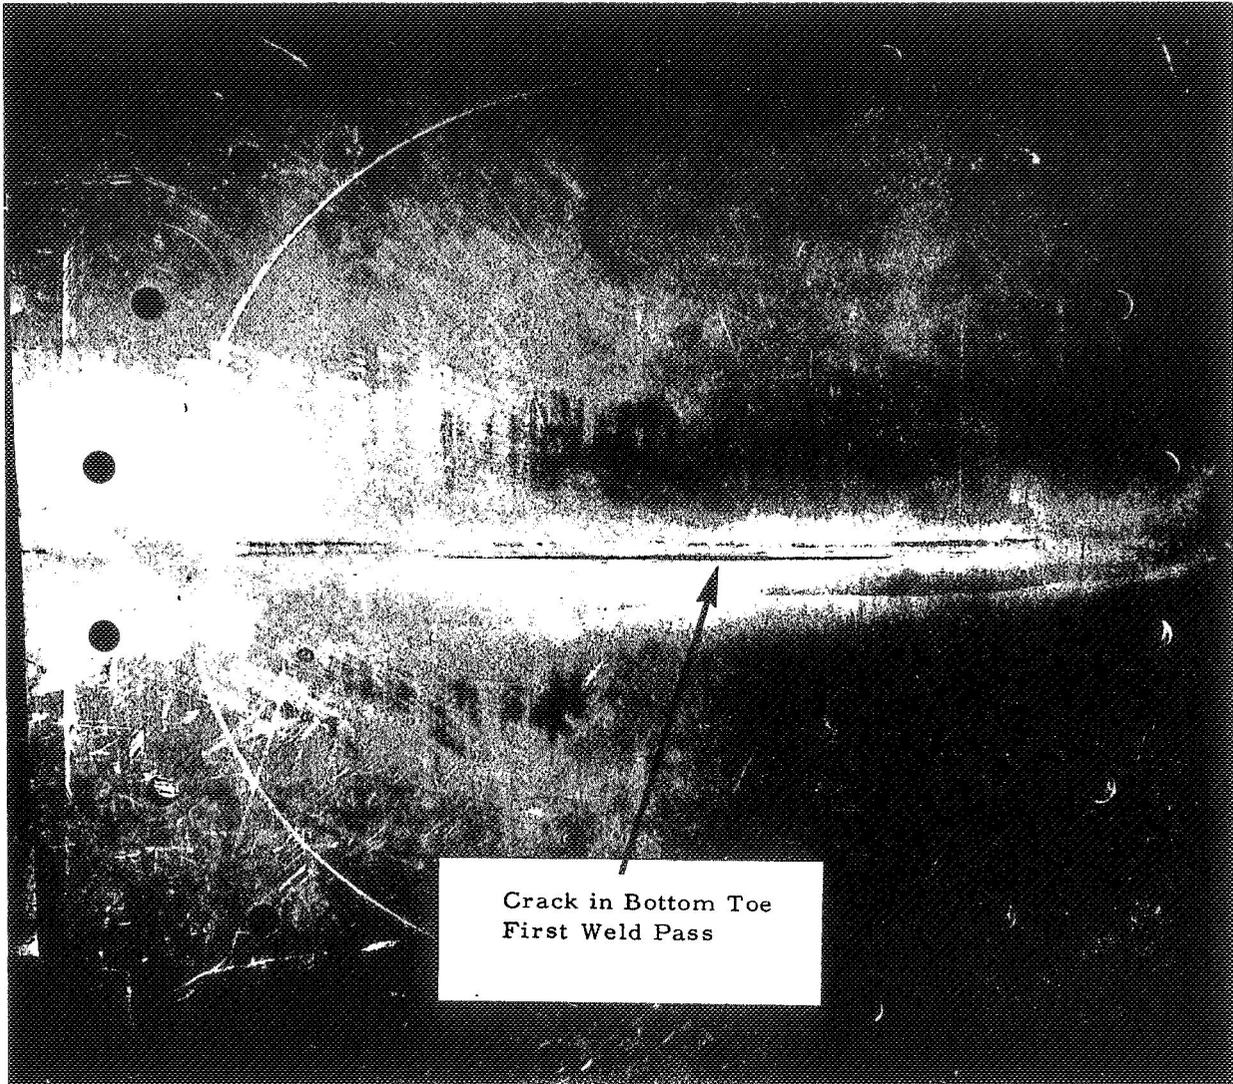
, Fracture in a 3/4 Inch Thick Welded 2219-T87 Panel After Bulge Testing
